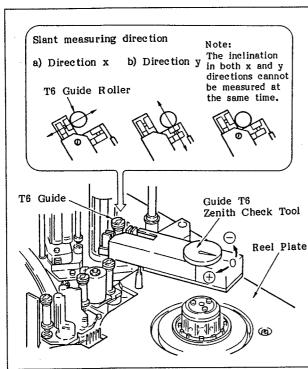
Measurement of the Inclination of the T6 Guide
